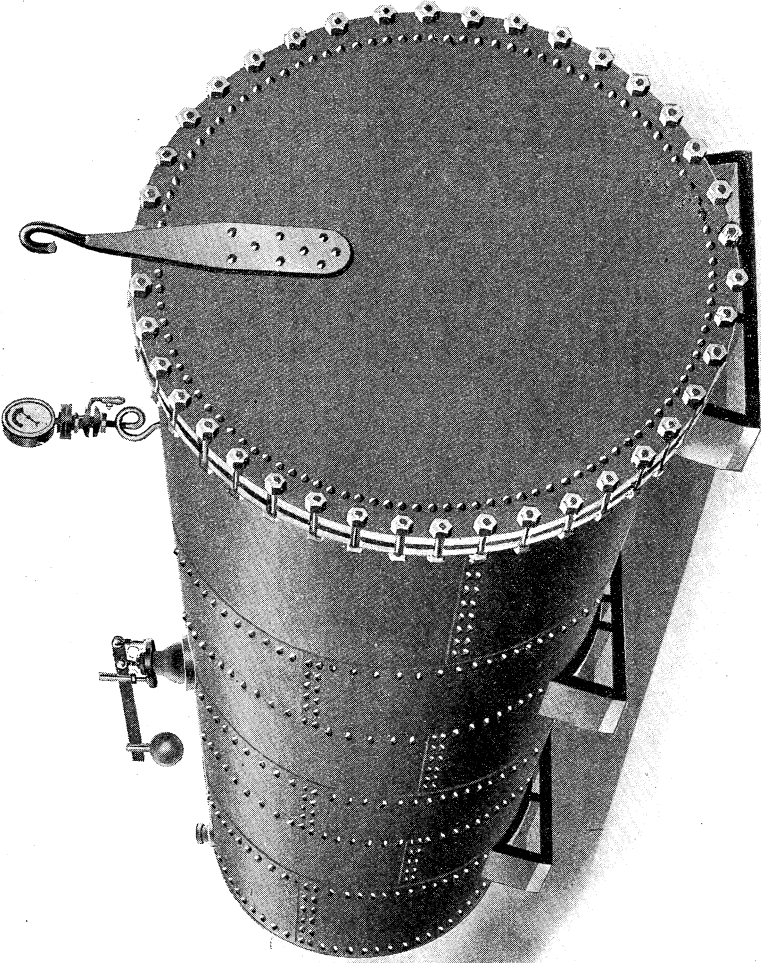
Showing a hardening boiler closed, with the head bolted in position.
